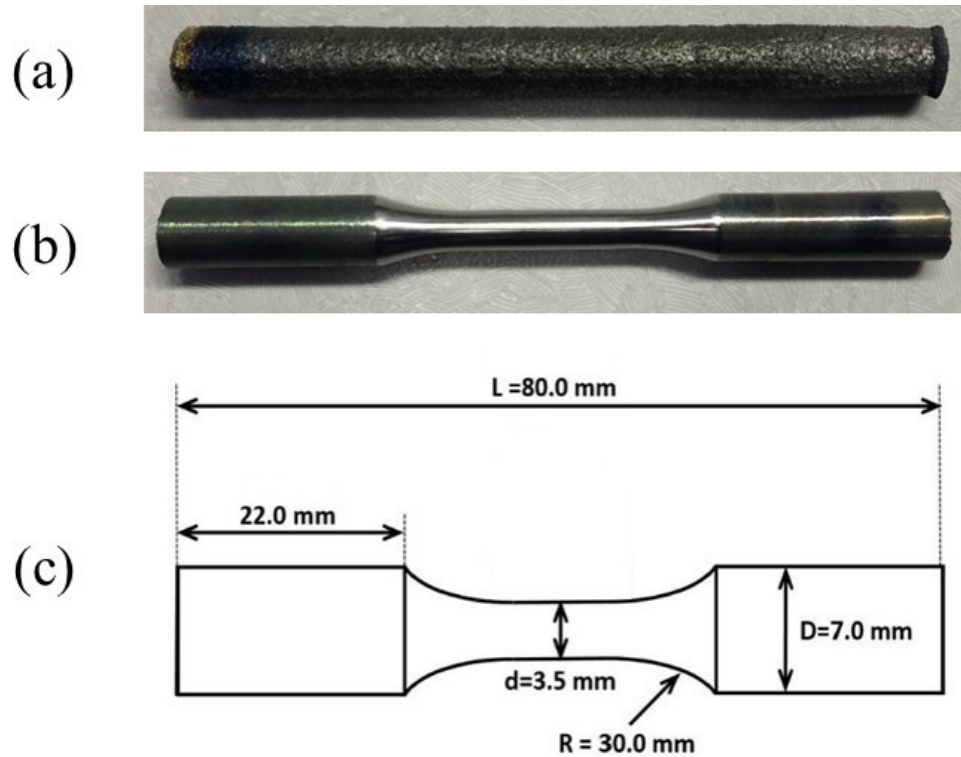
(a) As-built NiTi rod, (b) machined specimen, and (c) schematic of the fatigue specimen structure.
